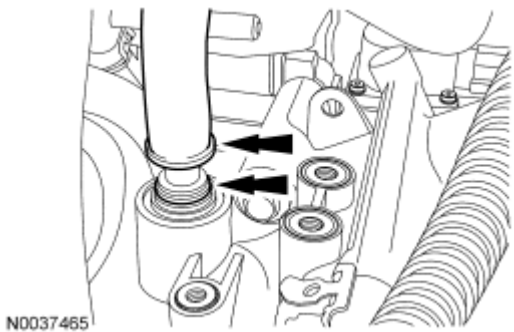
Locating Locking Ring And Brake Booster Vacuum Supply Tube
